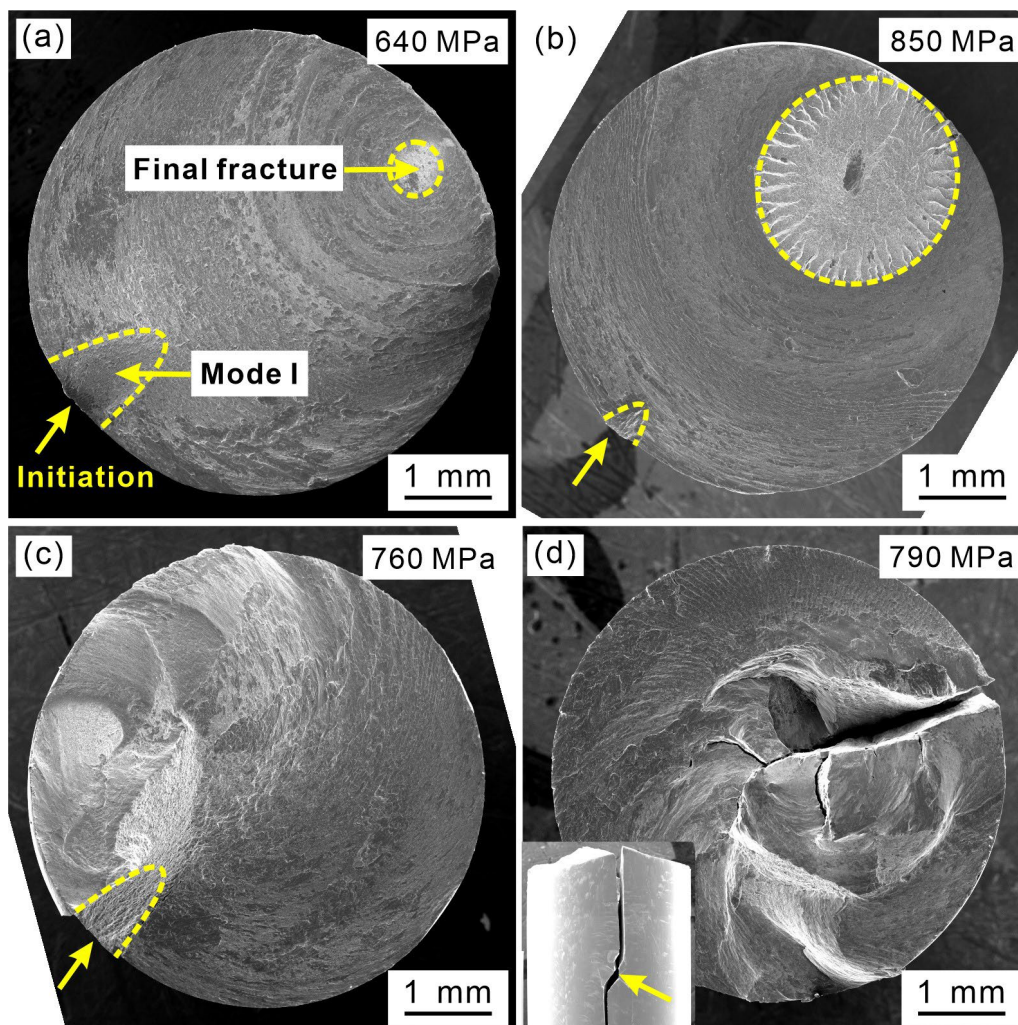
Three types of torsional fatigue fractures. (a) and (b) Type A. (c) Type B. (d) Type C fracture.
